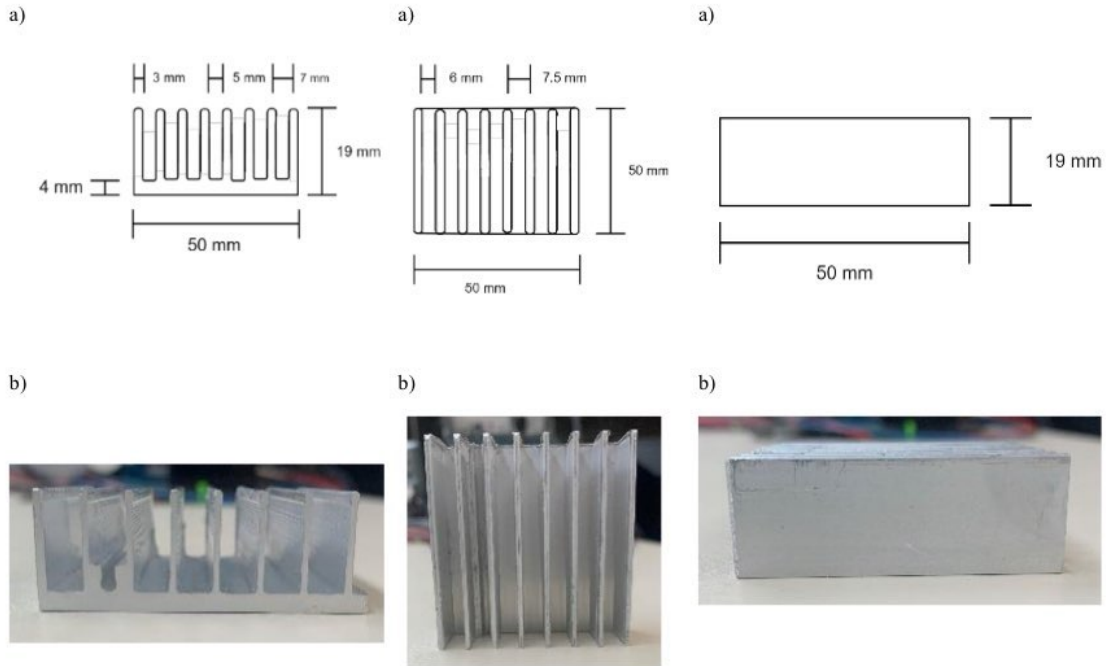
Module C a) Front View Schematic, b) Front View Image
